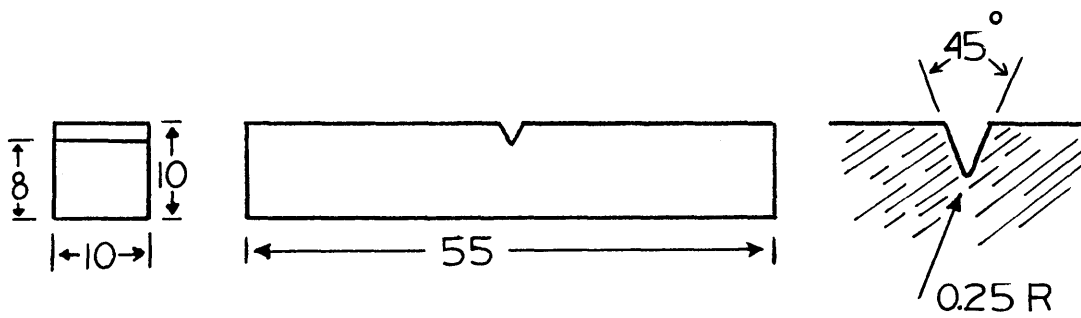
Standard size Charpy impact specimen. Dimensions are in millimeters.
